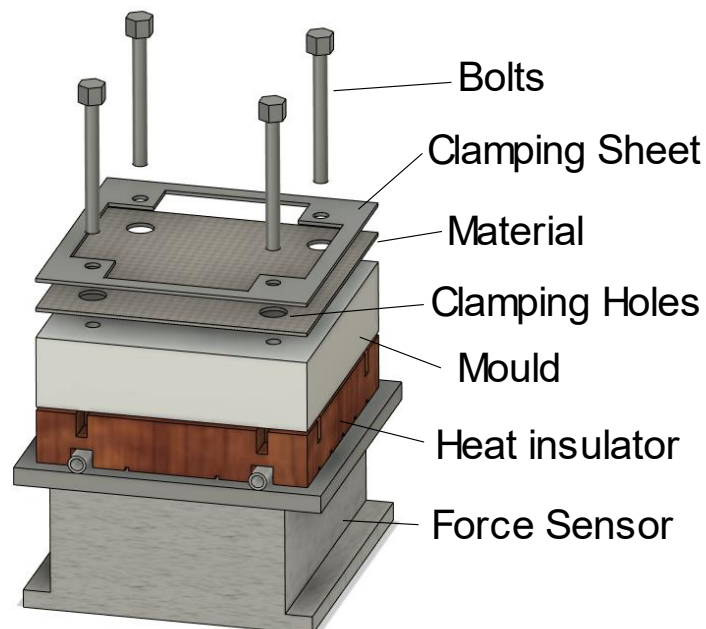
Clamping mechanism of the laminate over the hot mould. The layers are cut and stacked
